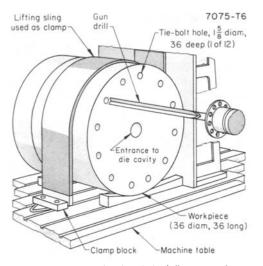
Setup far deep-hale drilling an explasive farming die in a boring mill. Dimensians given in inches
